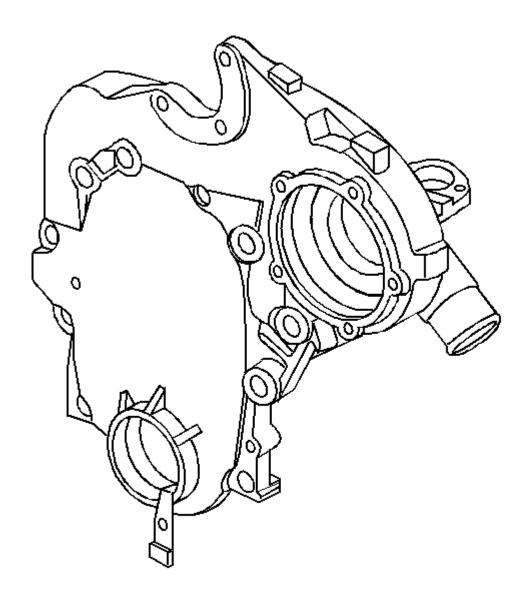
Engine Front Cover Courtesy of GENERAL MOTORS CORP.
